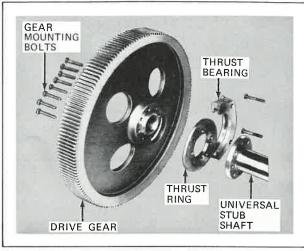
CAMSHAFT DRIVE AND THRUST BEARING ASSEMBLY.
